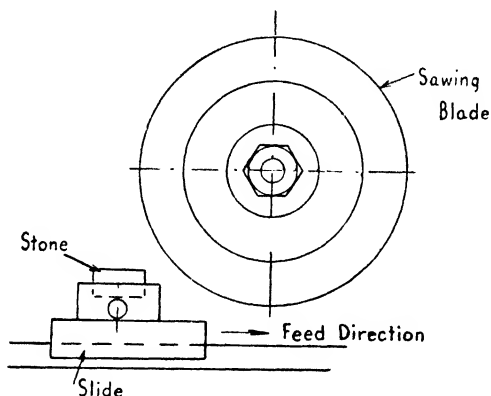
Principle of the sawing operation in machine, Fig. 107
